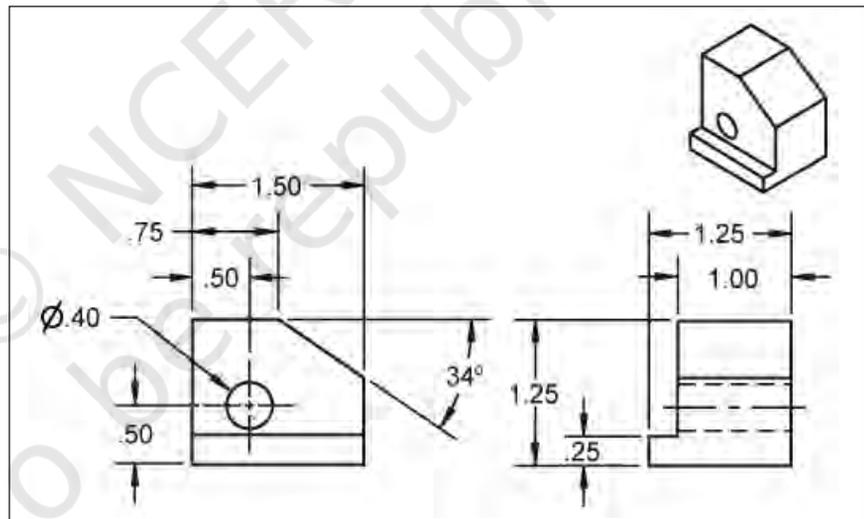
Dimensioning of a 2-dimensional drawing
